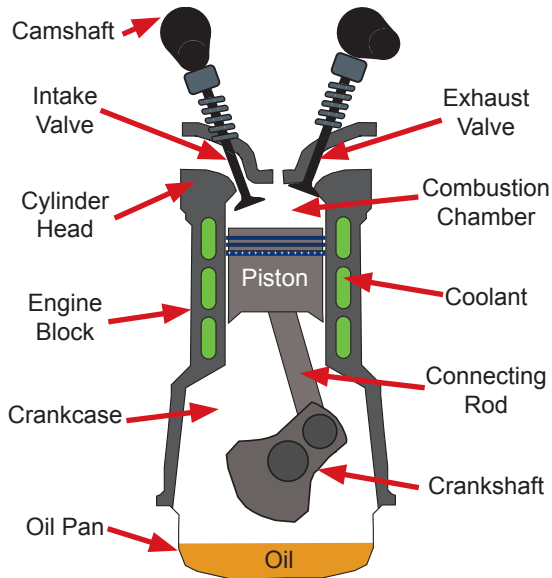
Dual Overhead Camshaft (DOHC) Engine
